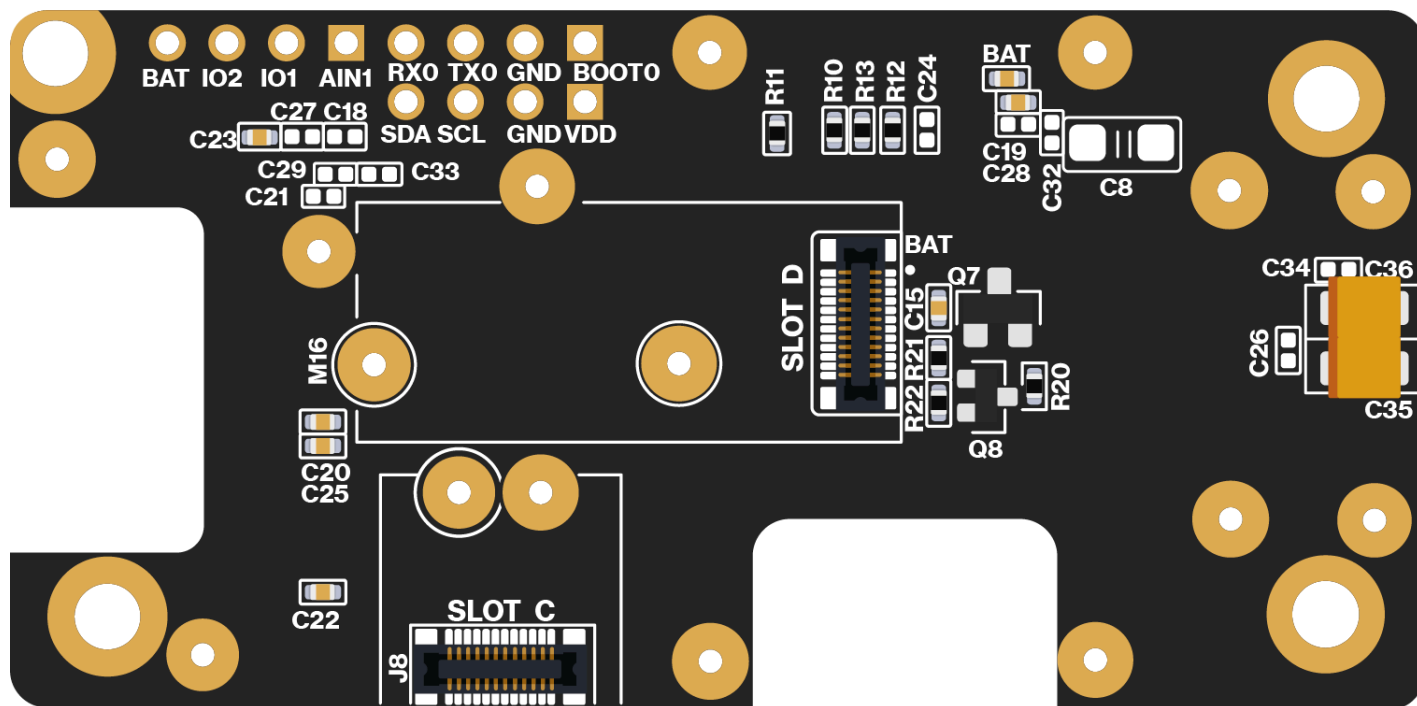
RAK19010 WisBlock Base Board with Power Slot bottom view
